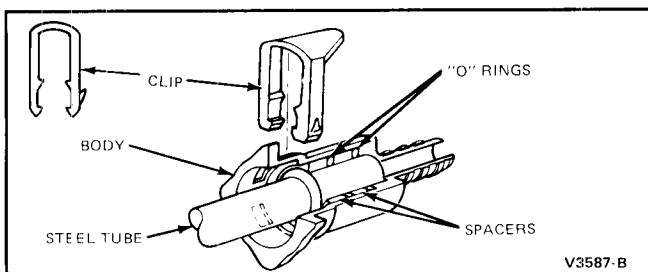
Push Connect Fitting With "Hairpin" Clip
